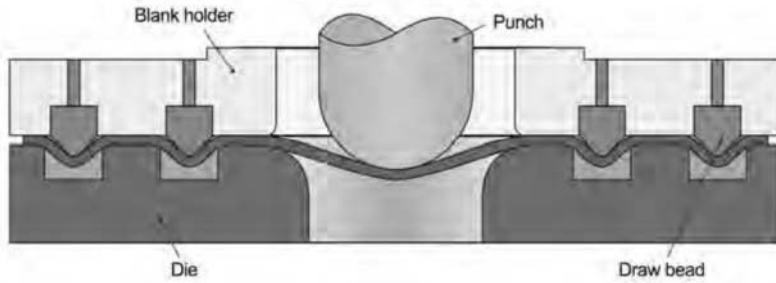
Draw beads located in the blank holder. Source: Ref 2.4
